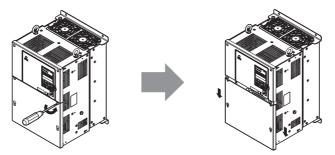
Removing the Terminal Cover on an IP00 Enclosure Drive
